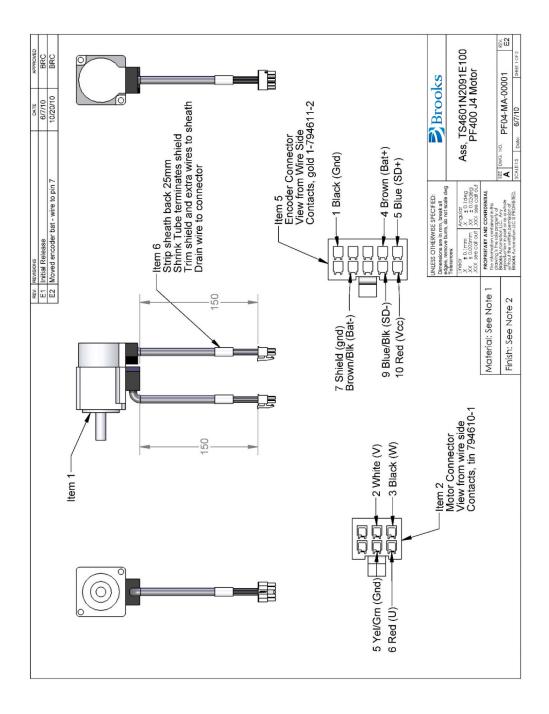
Assembly, TS4601N2091E100 PF400 J4 Motor
